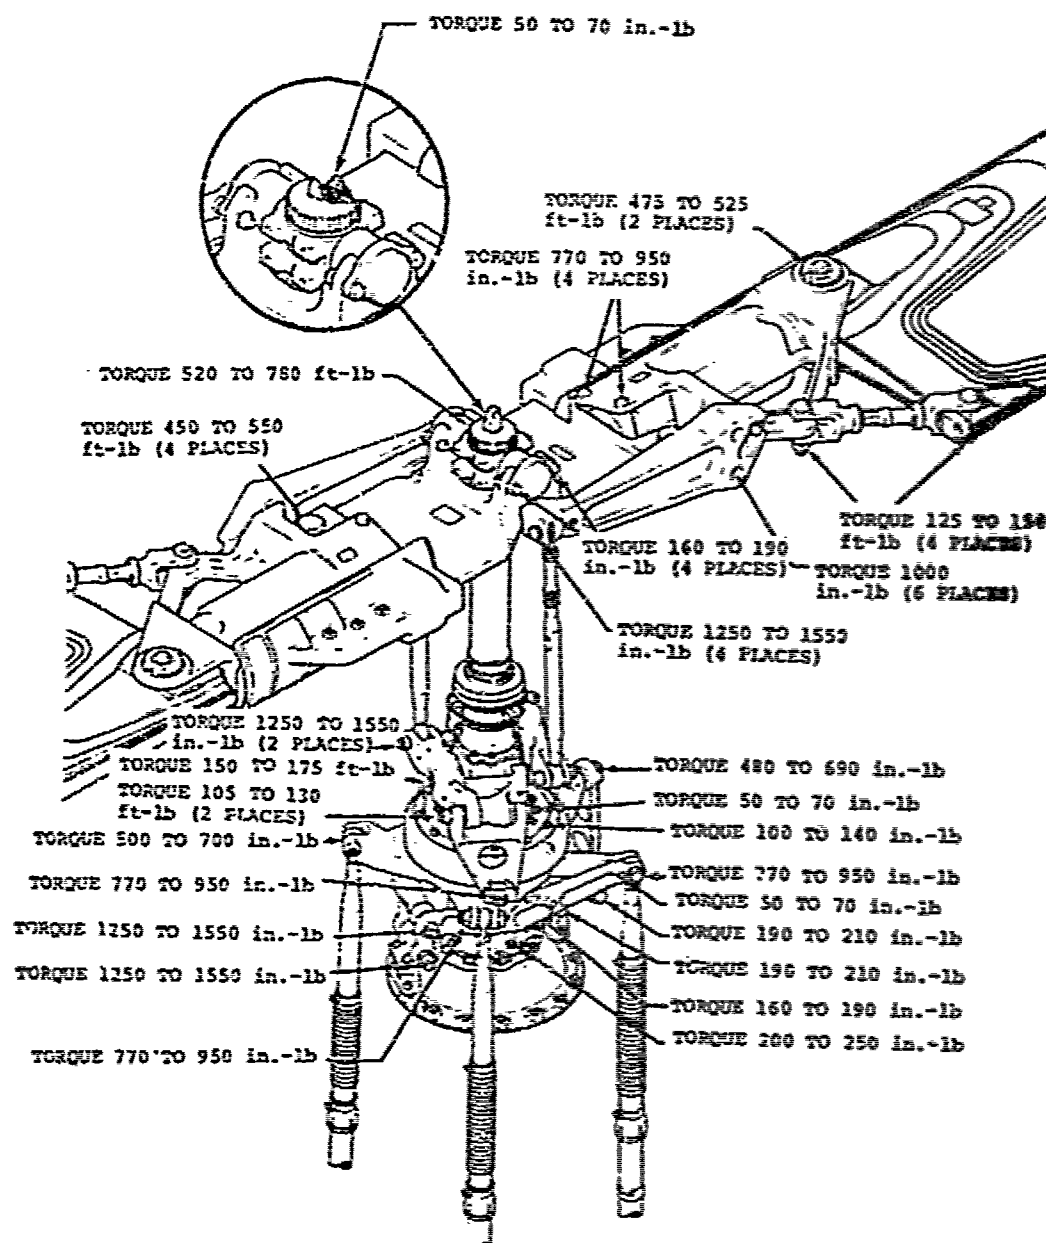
Rotor System Torque Valves, AH-1 Helicopter.
